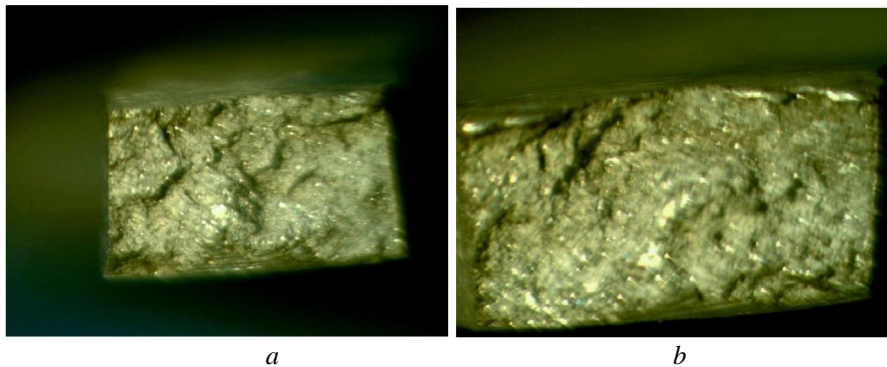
Base material surfaces not welded: *a* – very irregular smooth surface; *b* – pores and cracks on the surface.
